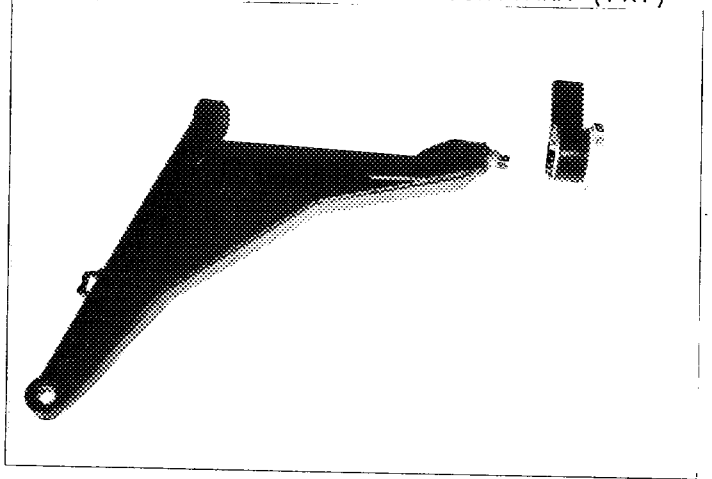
ADJUSTABLE STABILIZER ASSEMBLY
